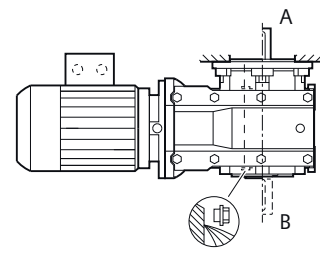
Mounting positions for bevel gearbox B.F flange-mounted design and B.Z with housing flange, sizes 19 - 29
